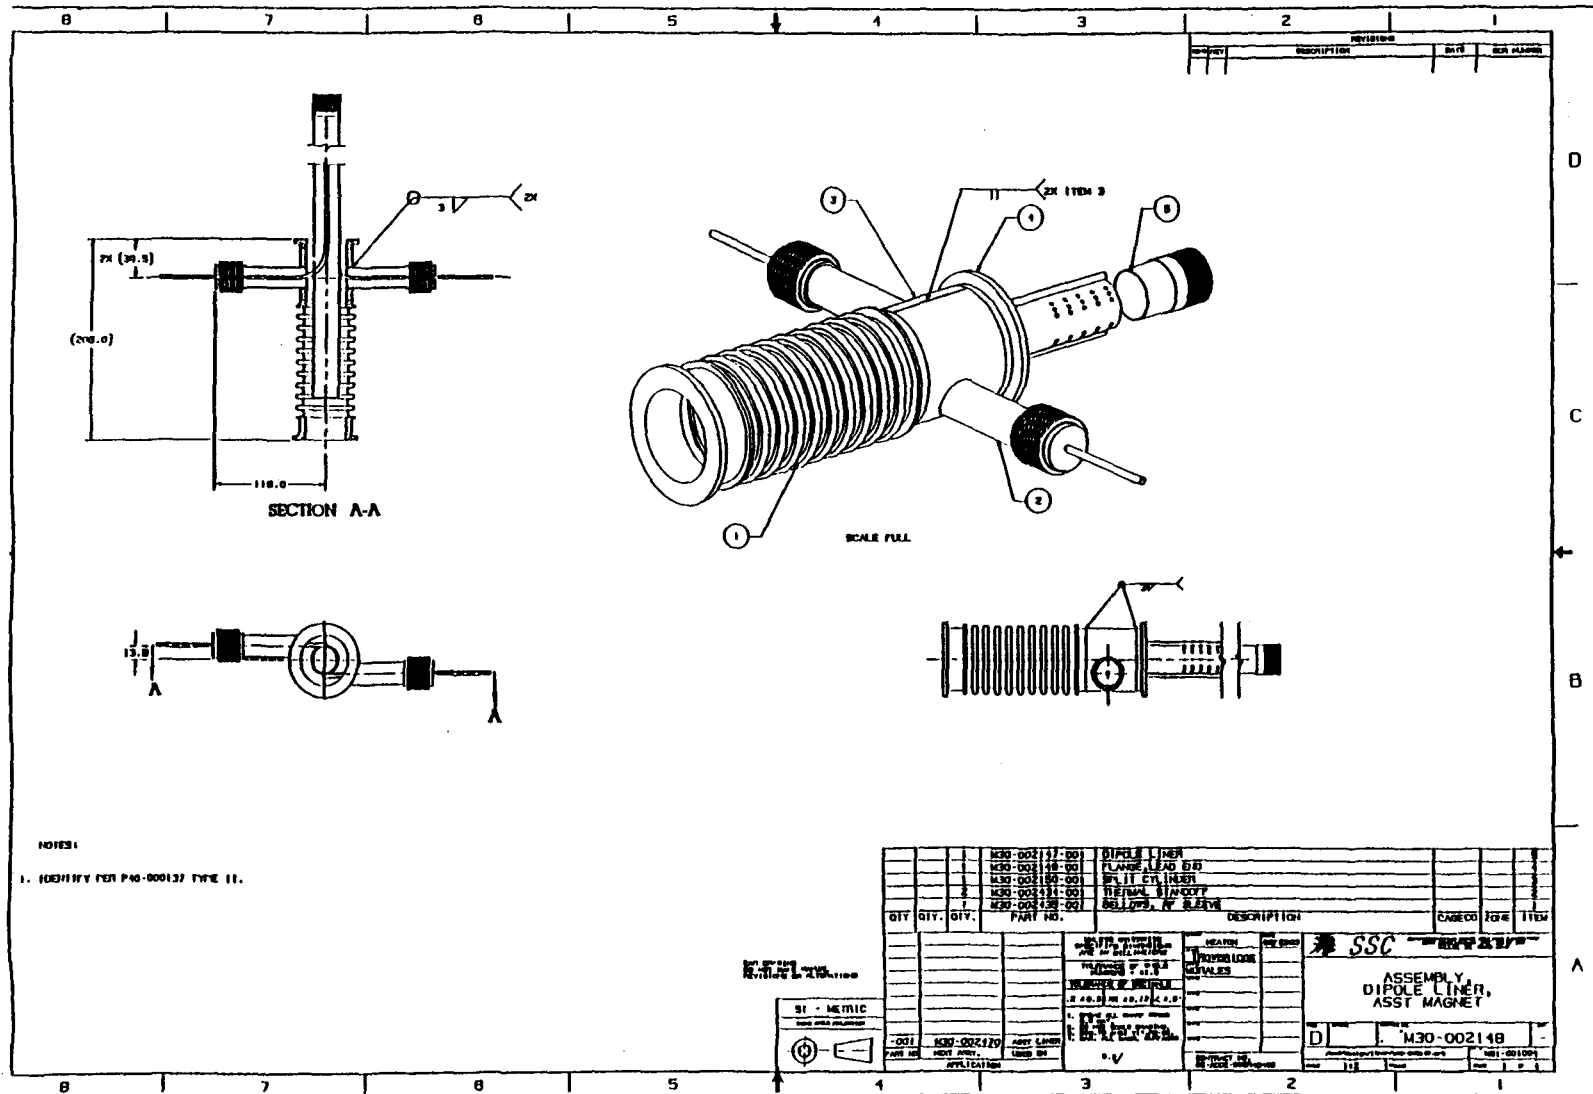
Dipole Liner Cryogenic Box Assembled on Dipole Liner.
